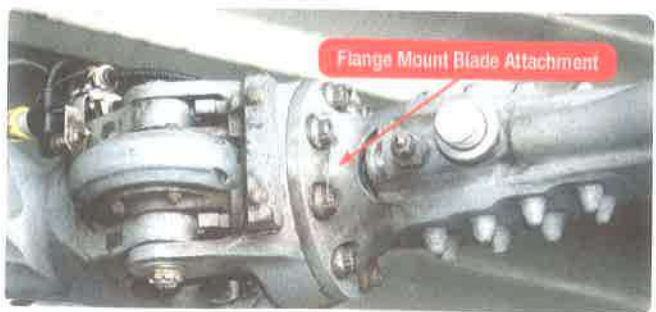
Method of blade attachment for Sikorsky SH-60 helicopter.
